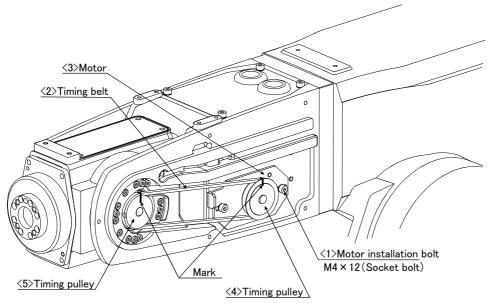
Inspection, maintenance and replacement of J5-axis timing belt
